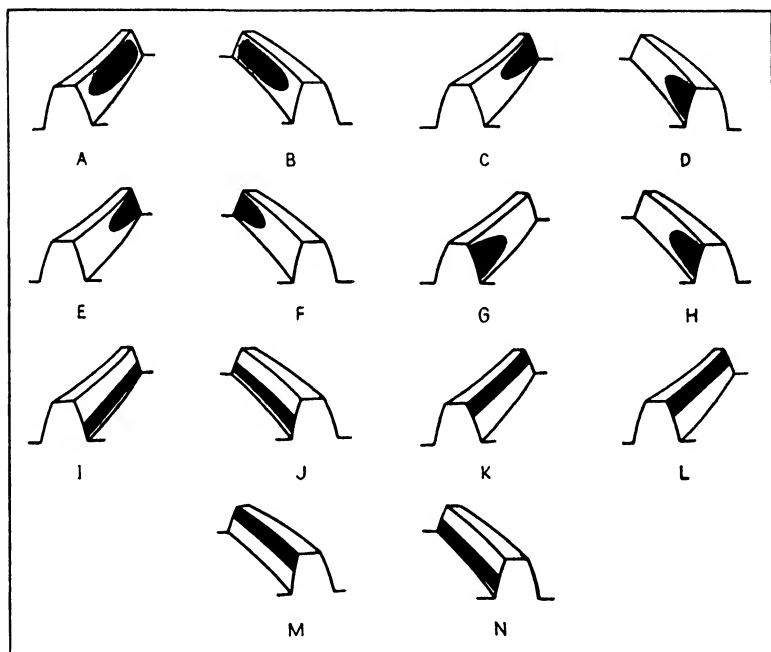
Tooth bearings formed in spiral-bevel gears.
